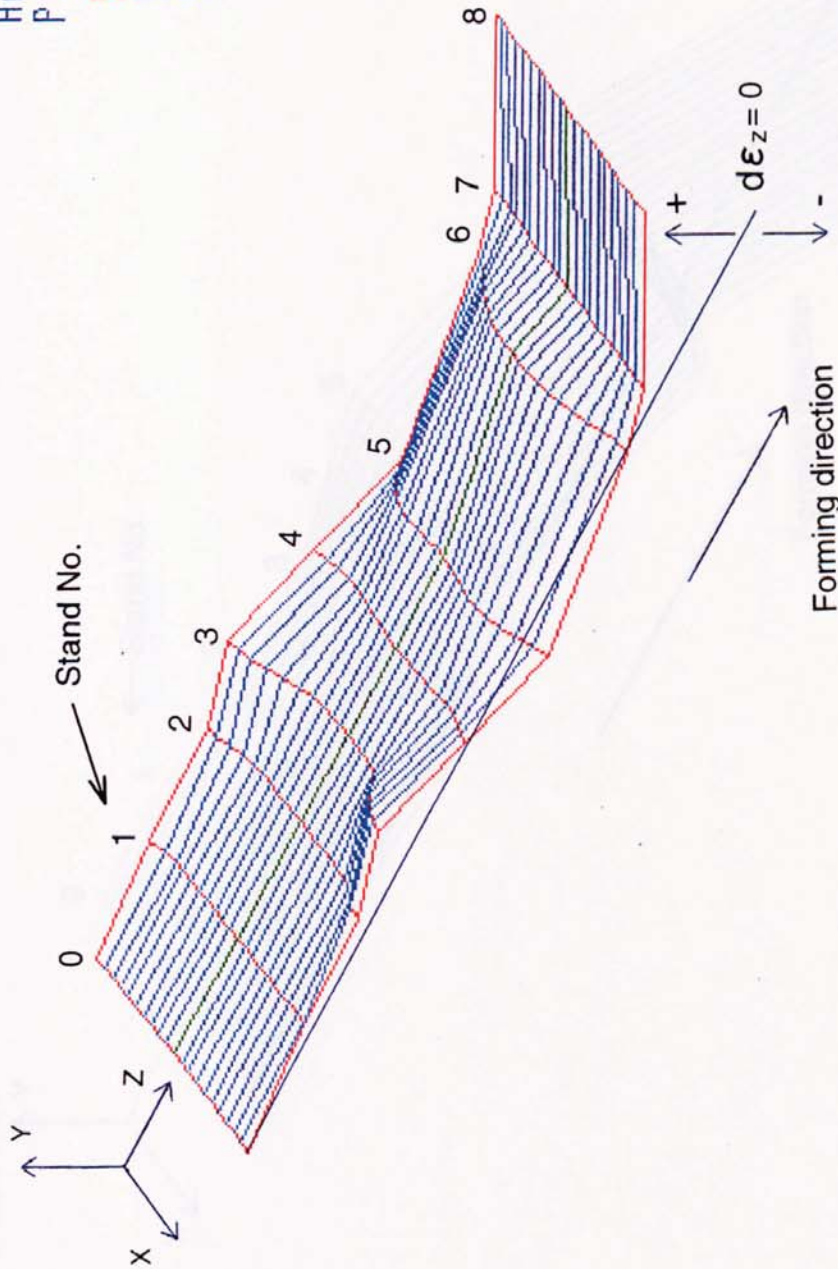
Computer graphic drawing of the 3-D deformed surface of strip constructed using planned flowers in the forming passes (View from the direction of Z-axis/bank(θ_B) = 0°, Y-axis/heading(θ_H) = 50° and X-axis/pitch(θ_P) = 40°)
